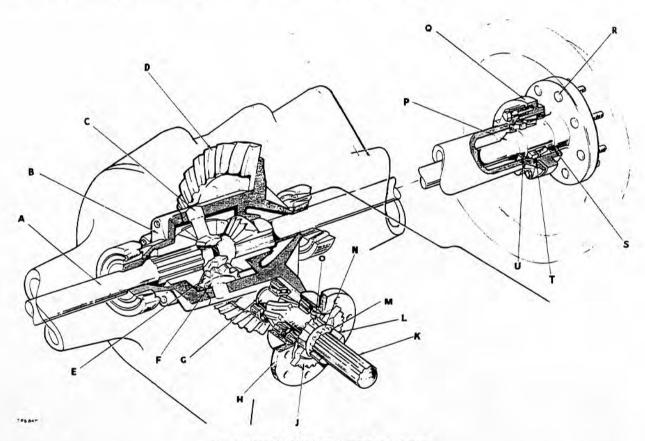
CUTAWAY VIEW OF REAR AXLE
